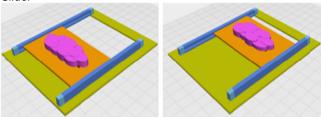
A slider movable carrying a cloud. A tactile cloud picture is placed on top of base that slides through side path.
